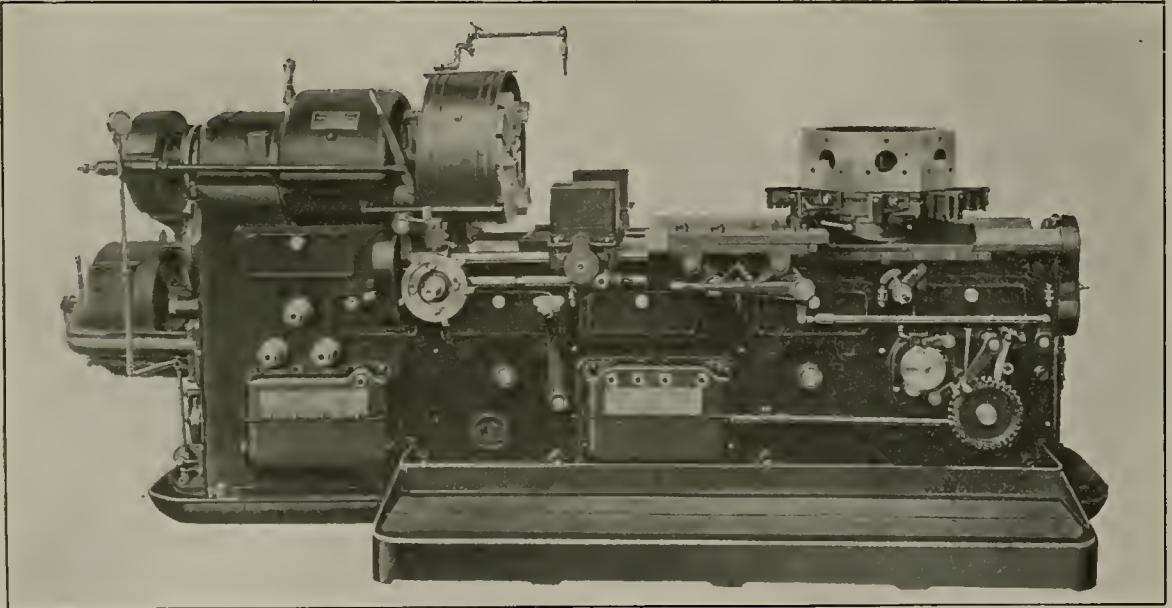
20-in. Gisholt Automatic Turret Lathe
